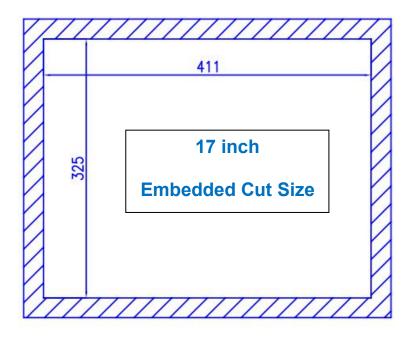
TPC6000-C174-L Embedded Cut Size
